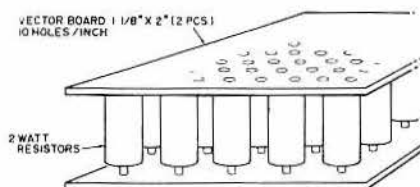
Sketch showing details of resistor "sandwich" assembly.
